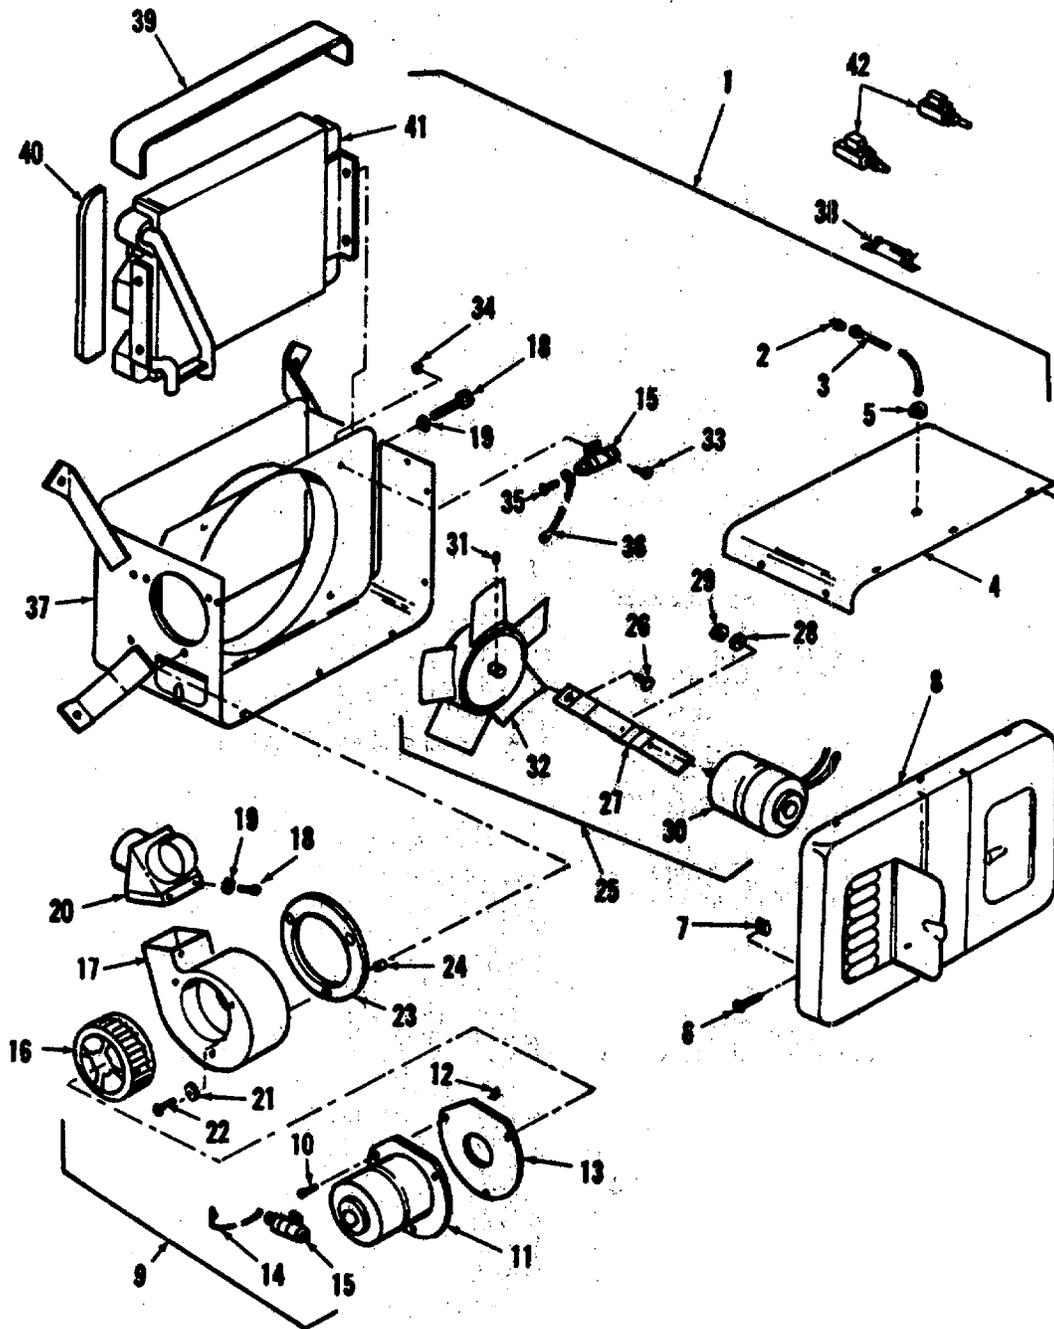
A. Vehicular compartment heater, for Model FT-500, exploded view.
